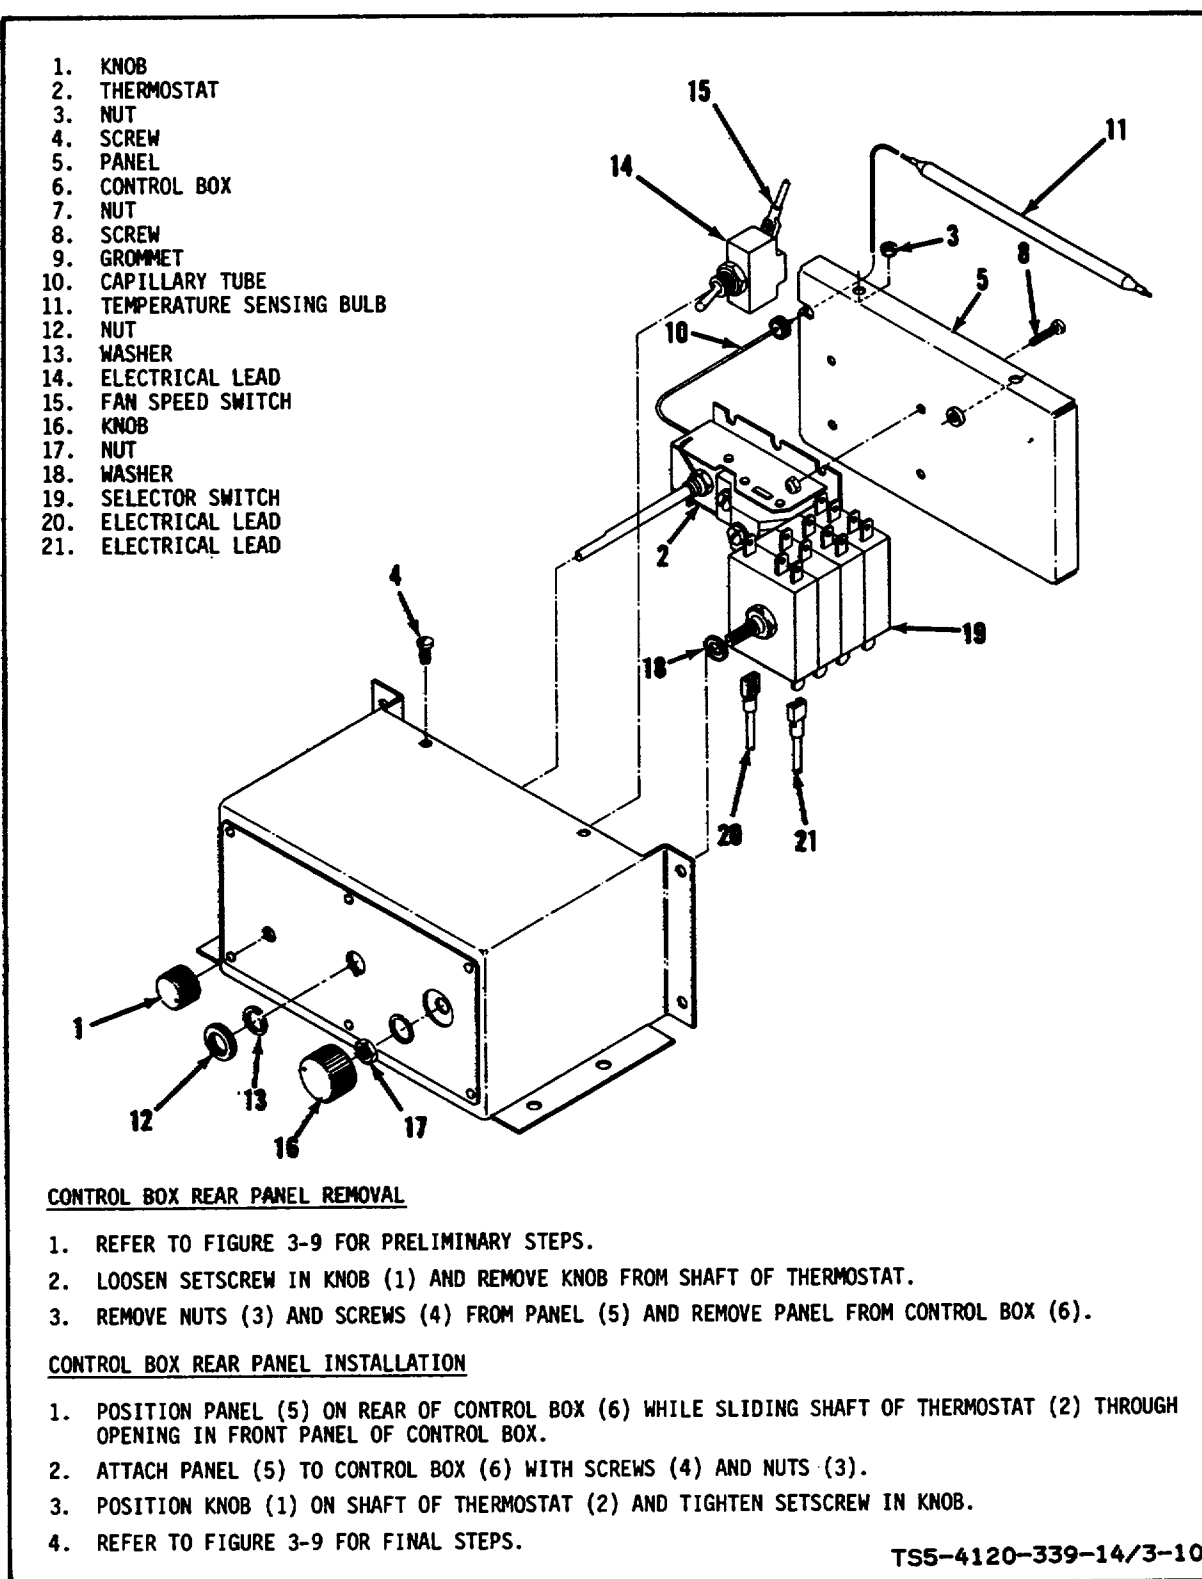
Removal and installation of control box rear panel and switches (sheet 1 of 2)
